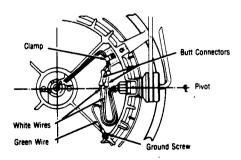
LAMP SOCKET WIRE ROUTING.
